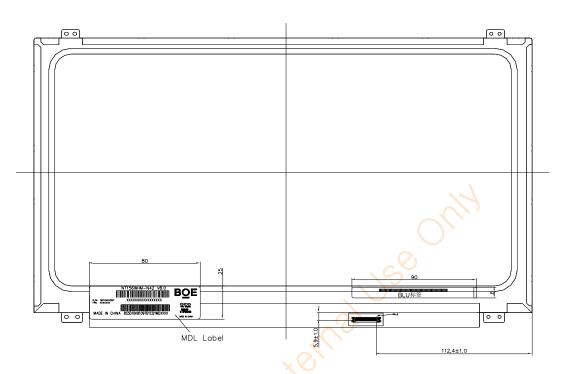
TFT-LCD Module Outline Dimensions (Rear view)
